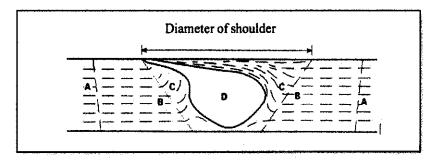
Schematic cross-section of FSW weld (A) - Base Metal (BM), (B) -Heat-affected Zone (HAZ), (C) - Thermo-mechanically Affected Zone (TMAZ) and (D) - stirred zone or weld nugget
